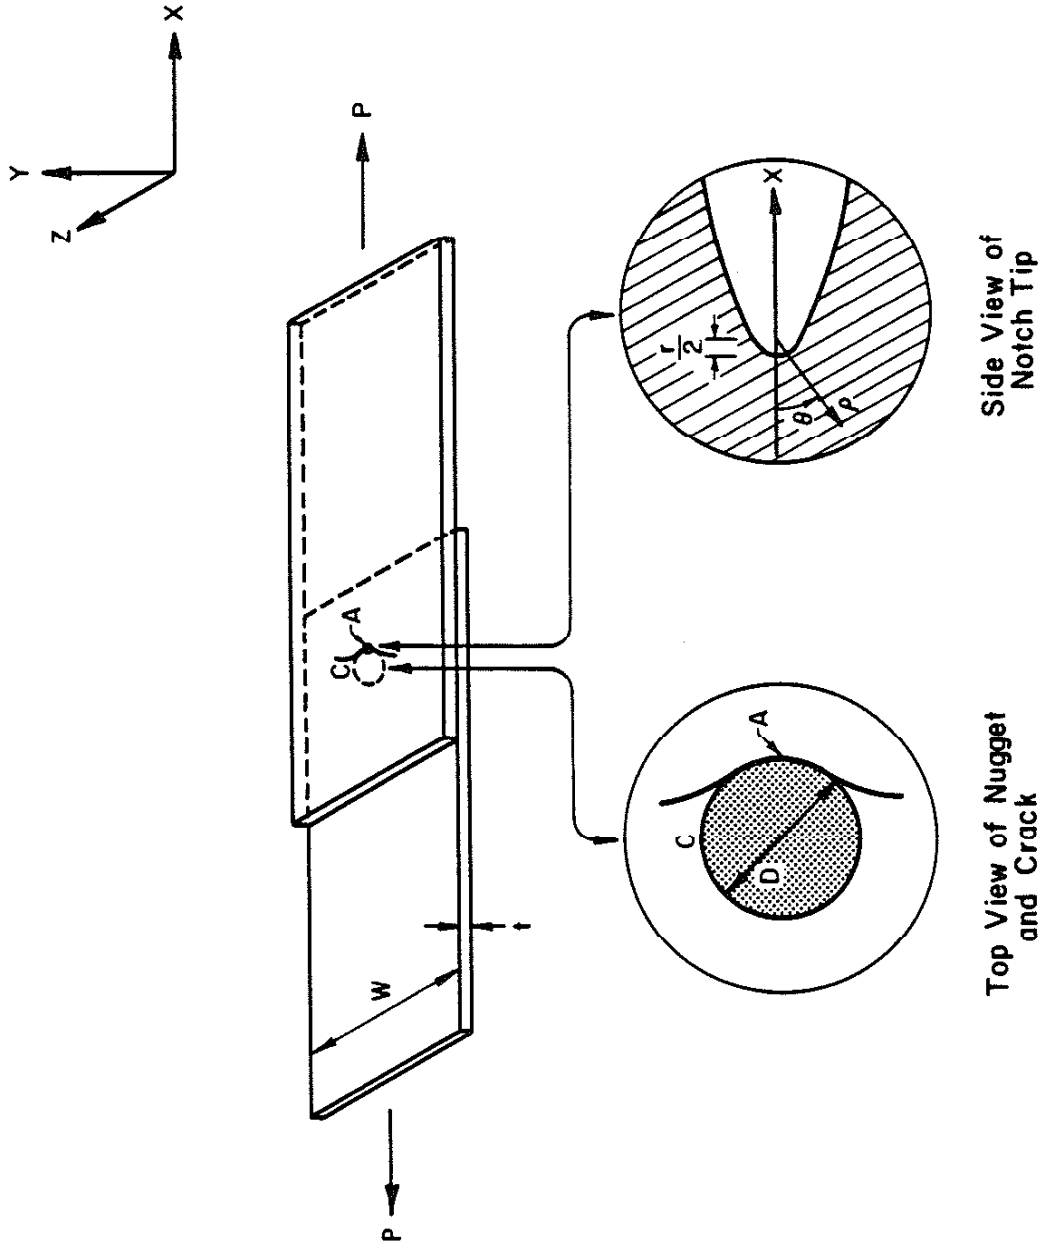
Geometry of the Tensile-Shear Spot Weld.  $\gamma$  is the Notch Tip Radius.
